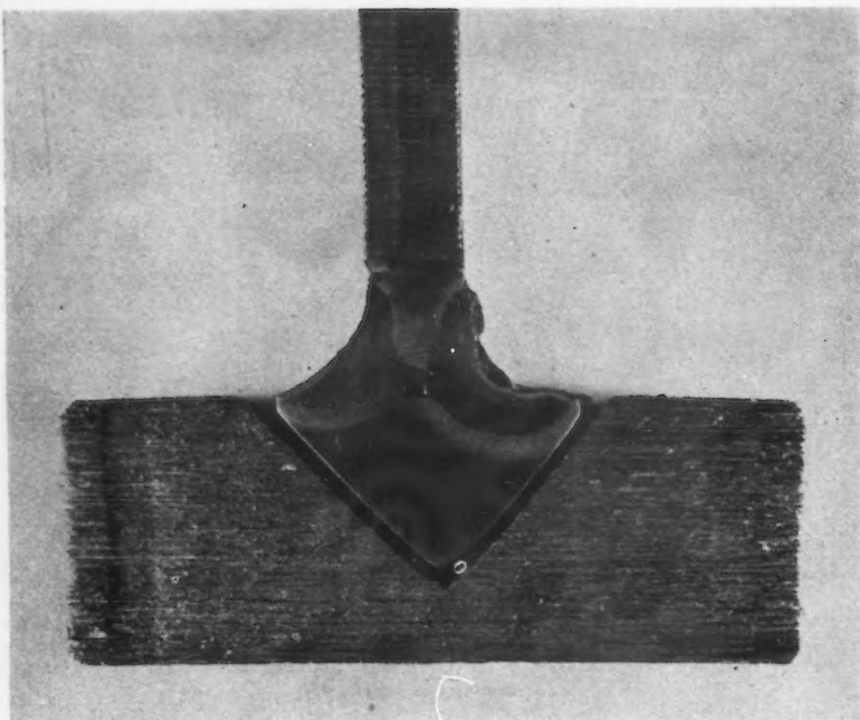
A section of a welded T joint which has been removed, polished and etched to show the heat affected areas at the margins of the welded areas. These areas (light colored surrounding dark weld metal) are likely to be hard if the steel is high carbon or alloy and may cause broken tools or irregularities in machined finish unless they are avoided or removed by normalizing.
